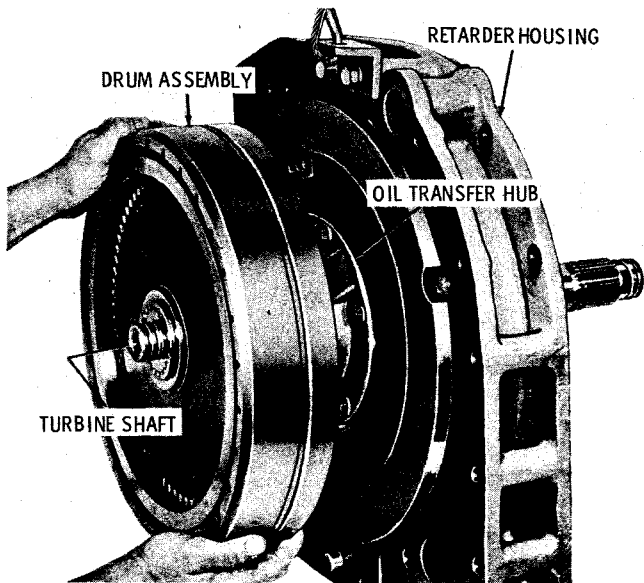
Removing low-splitter clutch drum assembly (CBT, CLBT, VCLBT) S1590
